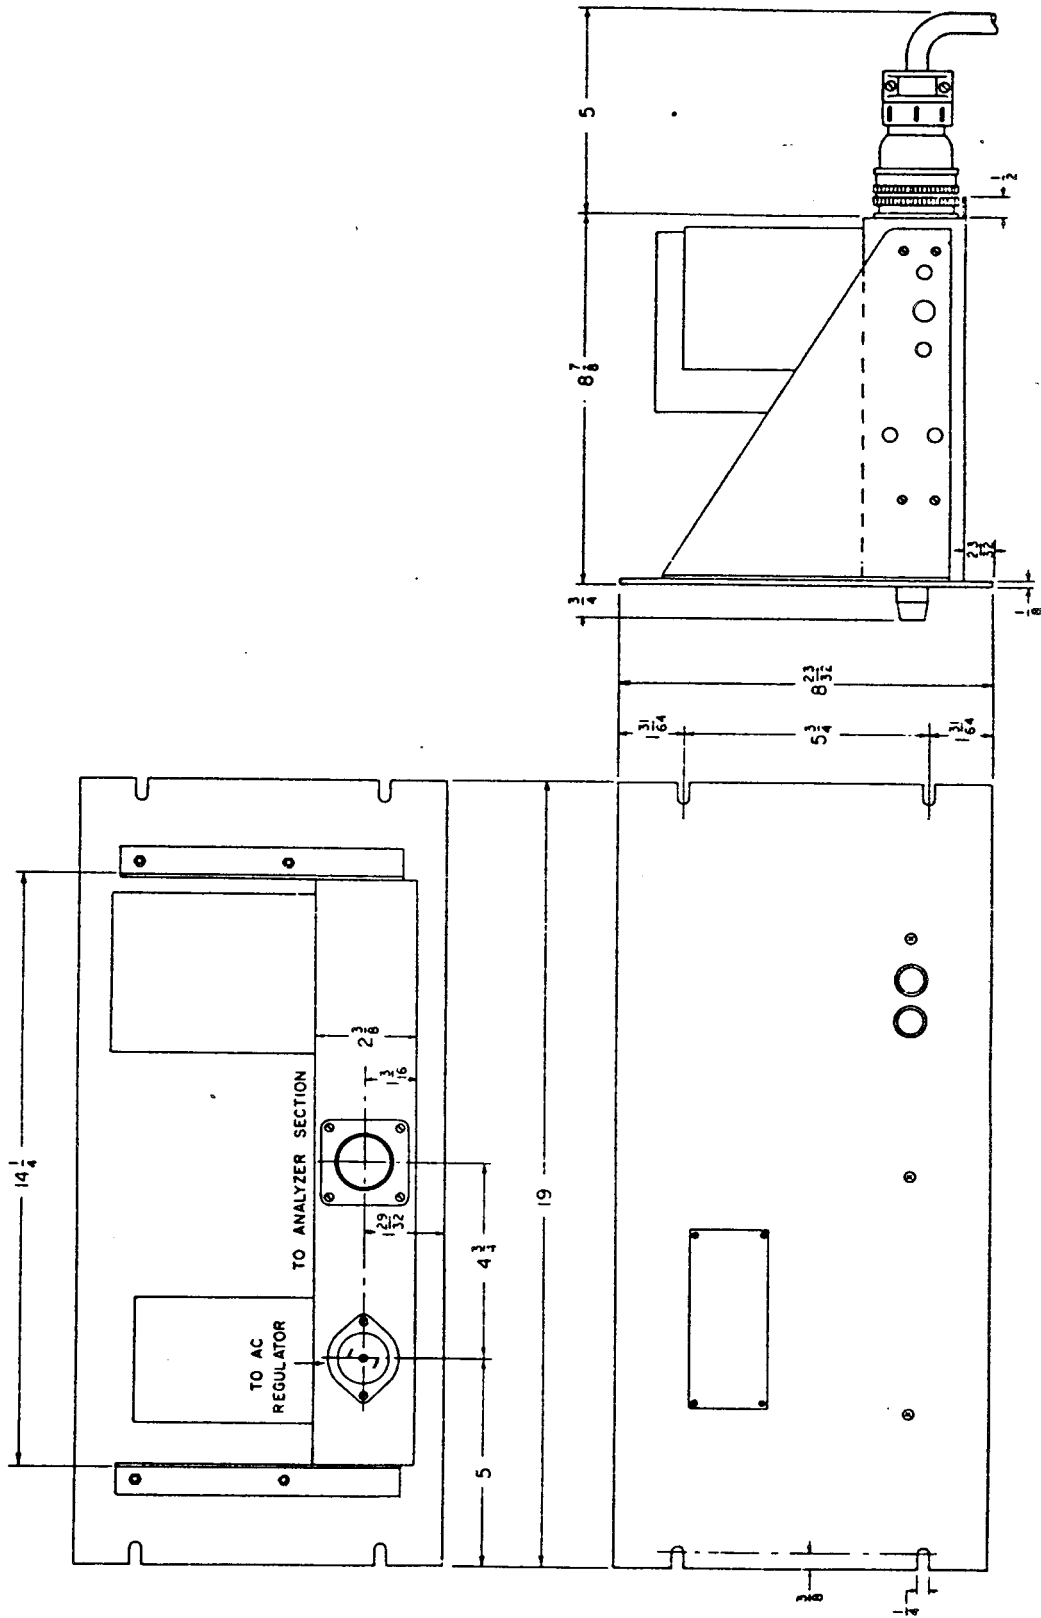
Outline Dimensional Drawing, Model PS-8b, Rack Mount Style.
